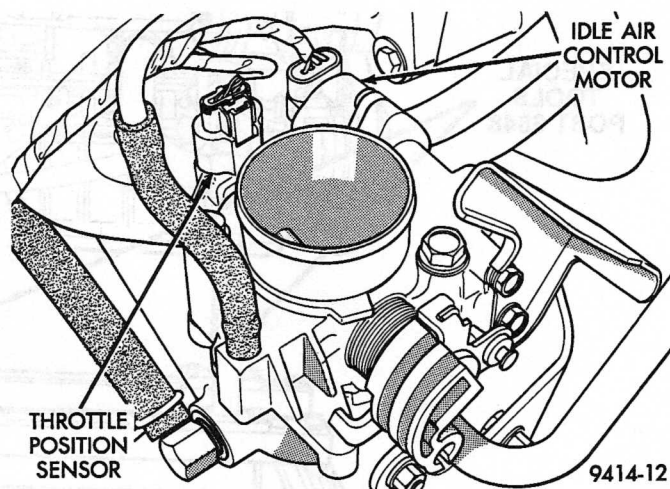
Idle Air Control (IAC) Motor and Throttle Position Sensor (TPS) Wiring Connectors.
